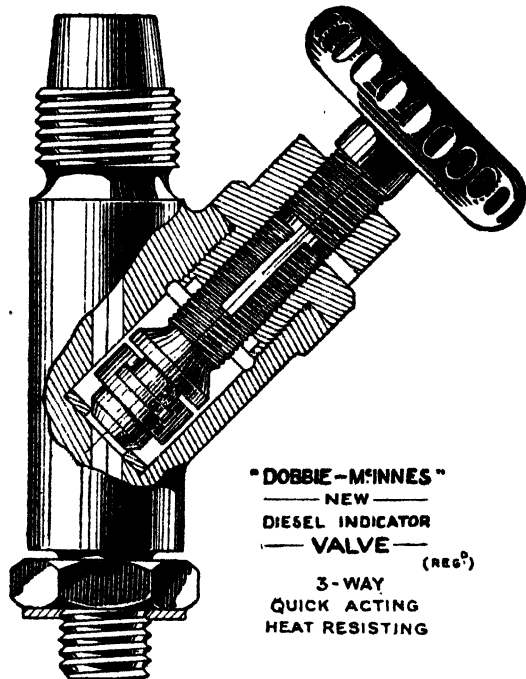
“DOBBIE-McINNES” DIESEL INDICATOR VALVE, SHOWN CLOSED TO ENGINE AND INDICATOR OPENED TO ATMOSPHERE
